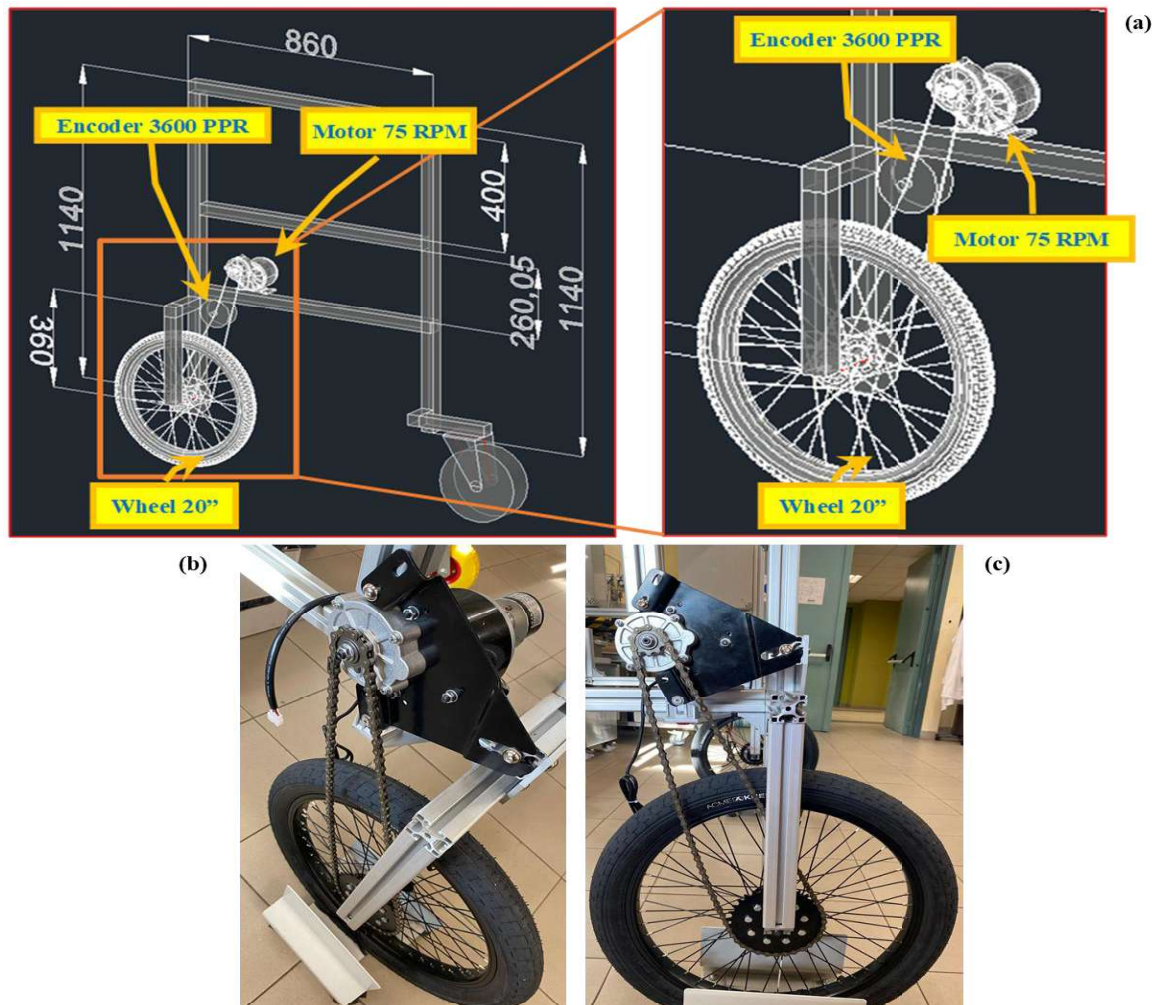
Mechanical assembly of the LEFT PART of the A-bot-X1 prototype (V11) (a). Focus on the layout of the mechanical connection (chain) between the electric motor, encoder and wheel (b,c).
